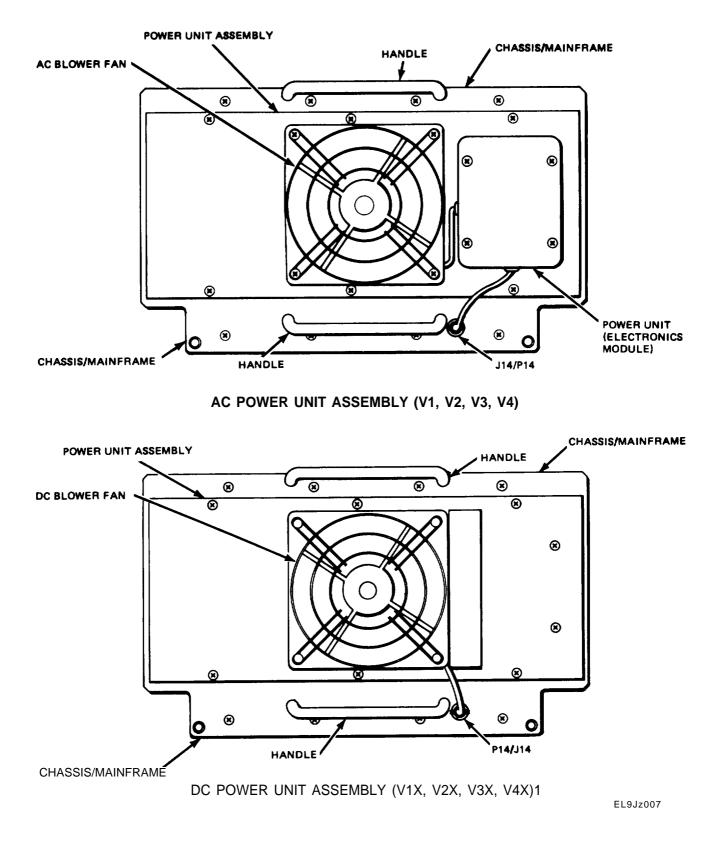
AC and DC Power Unit Assemblies, Rear View
